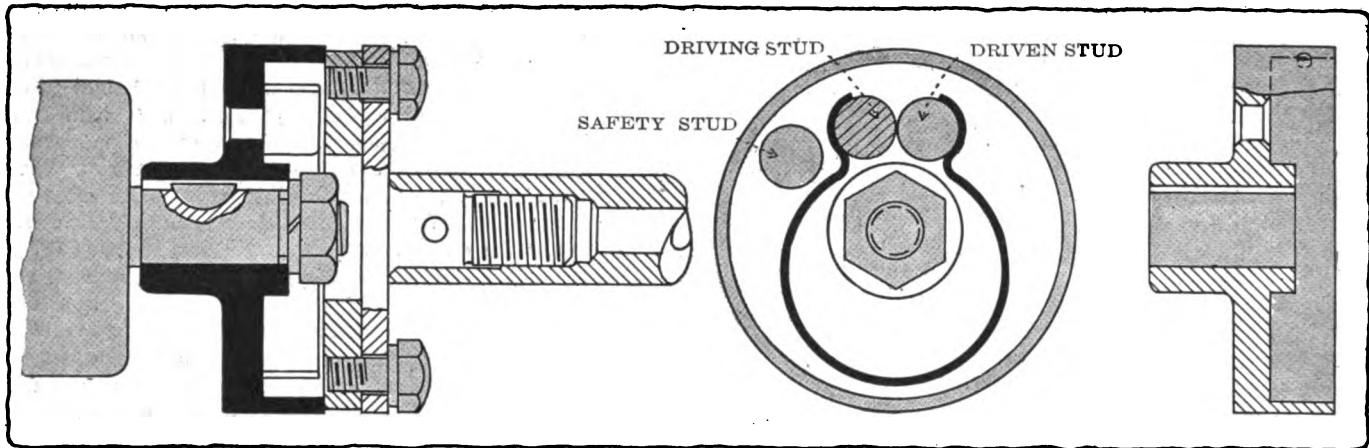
Side and transverse sections of spring magneto drive and a side section through feather type
